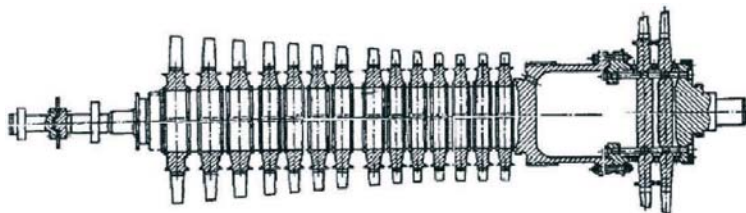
Gas turbine engine rotor (compressor part – with pressed-on discs, turbine part – with peripheral tie bolts)
